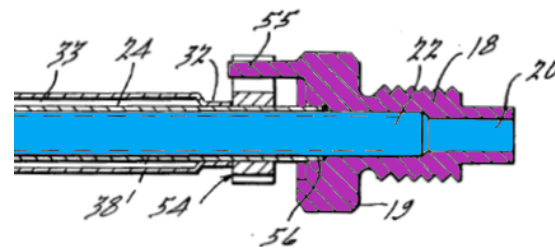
Schematic drawing of a mechanism that drives a reciprocating cutter. Components: 18 = collet holding the inner cutter, 20 = inner cutting tube, 32 = outer tube, 54 = stop, 55 = extremity extending from collet. Adapted from: [84]
